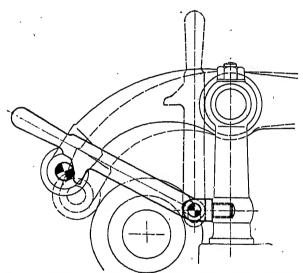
Arrangement for holding Exhaust Valve open while turning Engine by hand.
